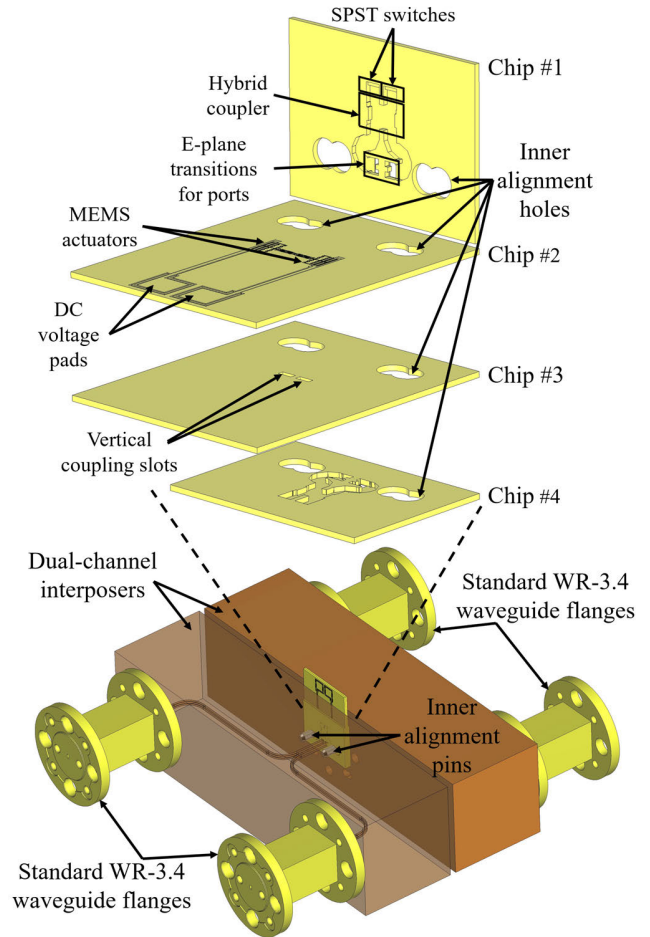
Exploded view of the vertically stacked SOI chips of the crossover switch prototype and a concept view of the measurement setup showing the assembled device mounted and aligned to two custom-made interposers with inner alignment pins.
